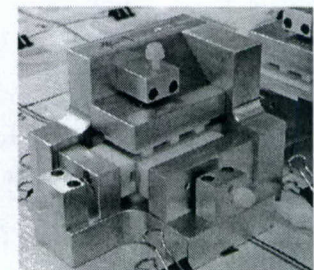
Gluing jig with sandwich compressed in 3 dimensions.
